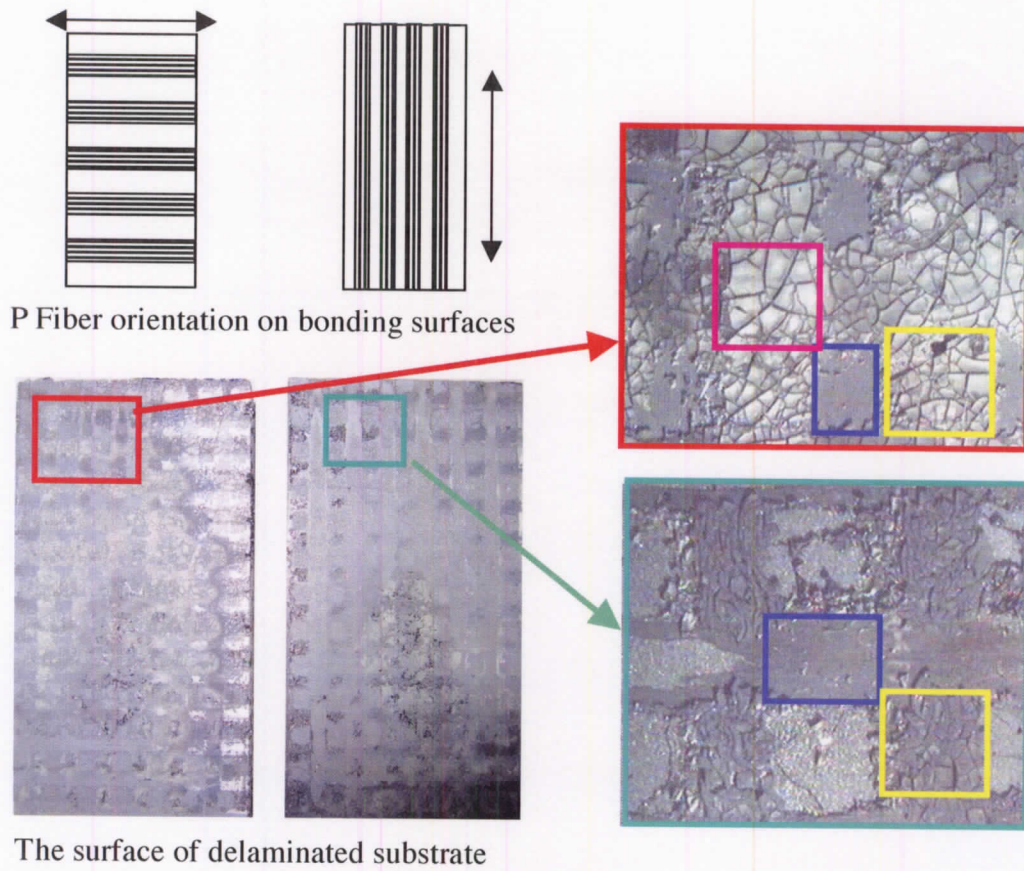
Photographs of fractured bonding surface of 3D-C/C bonding.
